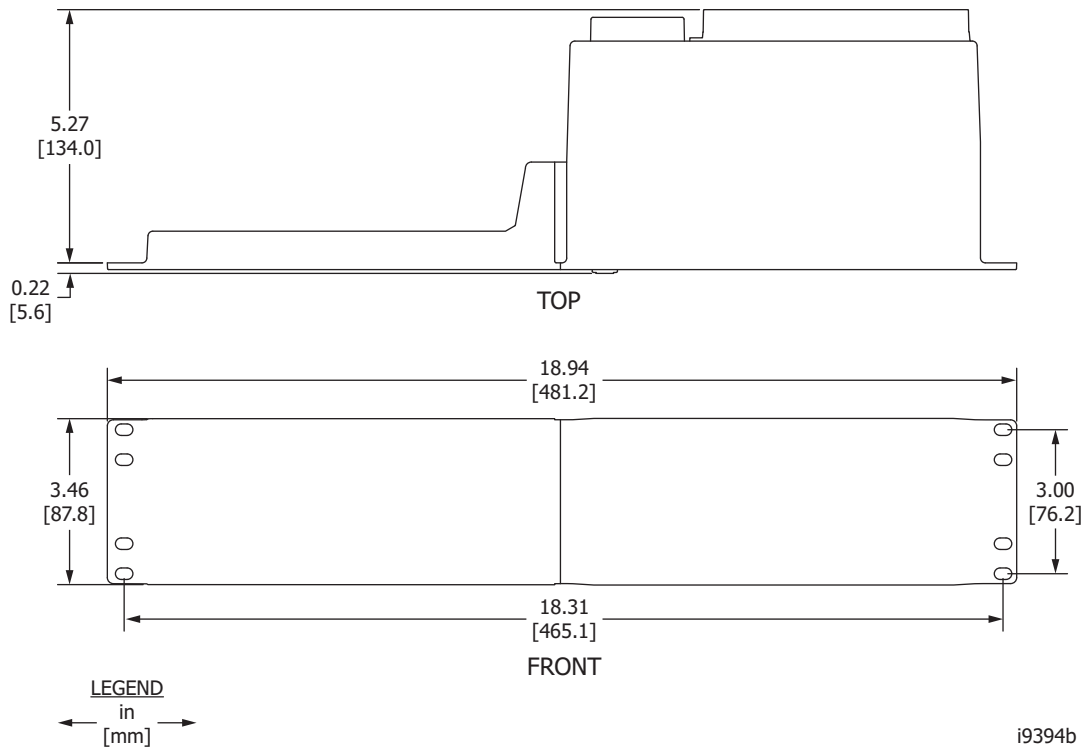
19-Inch Horizontal Rack Mount With Adapter Plate Option Dimensions
